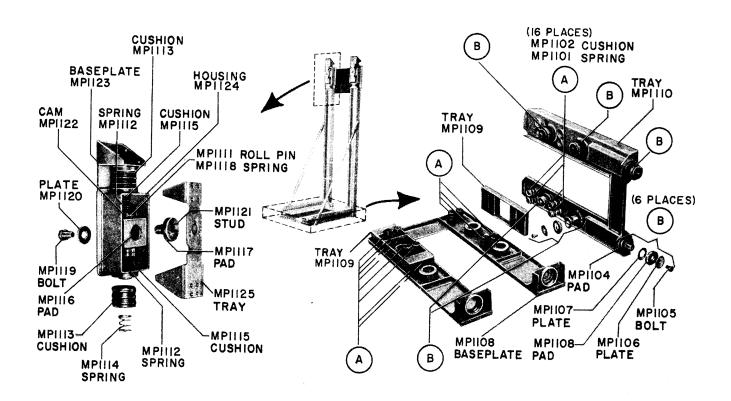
A. Mounting MT-2170/WRT, Replacement of Parts
